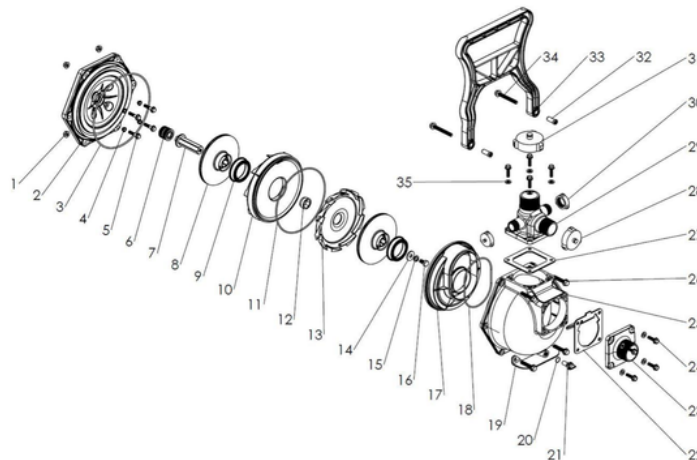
Exploded view of the VERSAX 6HP pump end (portable configuration).
